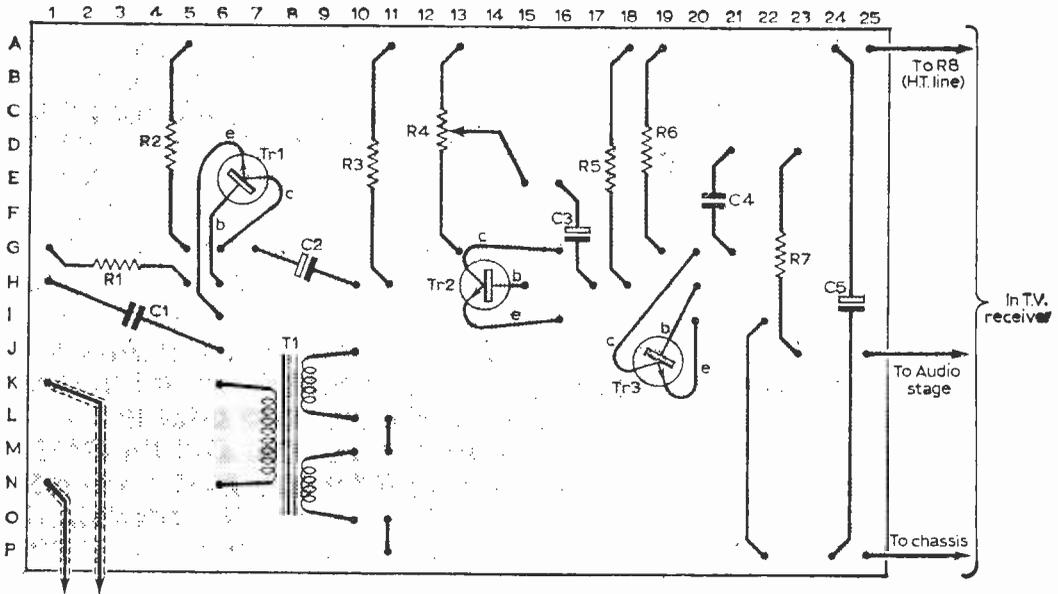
Suggested component layout of the standard circuit using Veroboard
